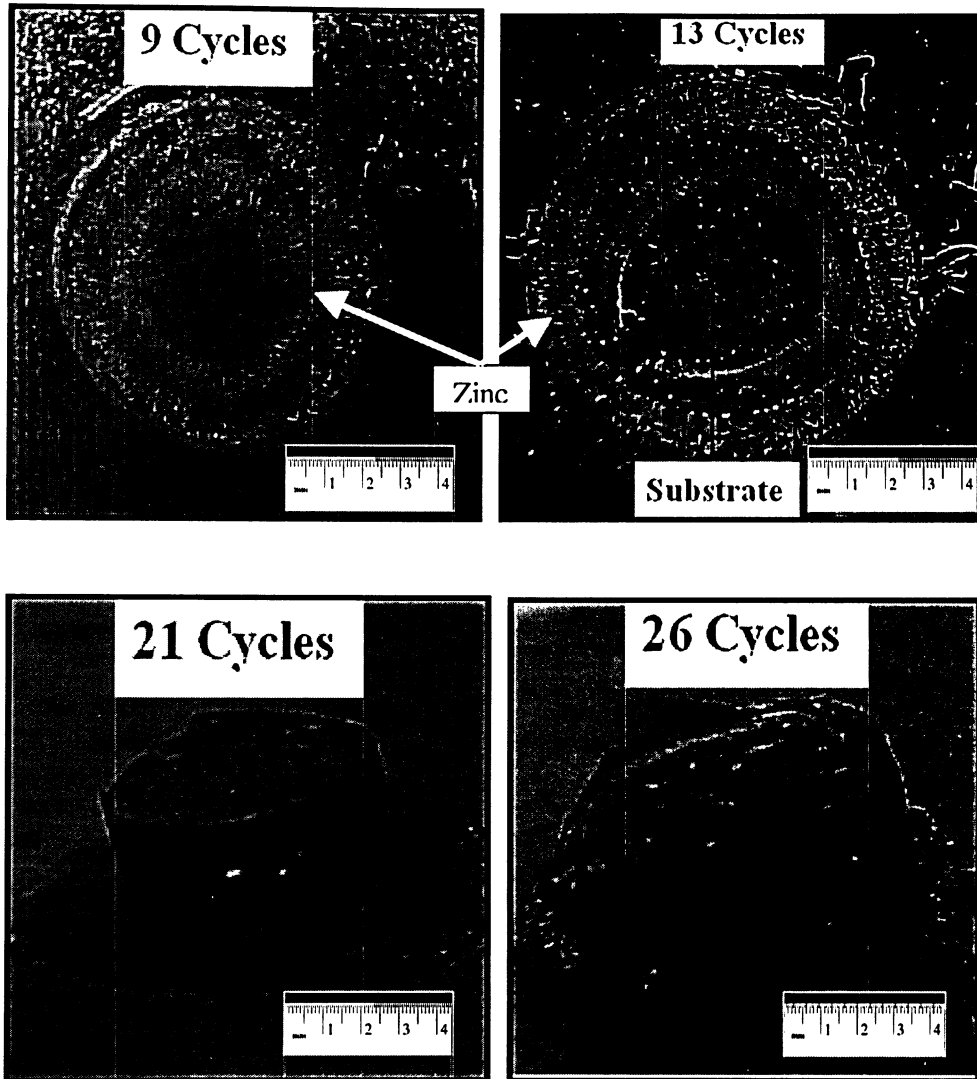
Macrographs at 9, 13, 21 and 26 cycles during single pulse welding of DP600
